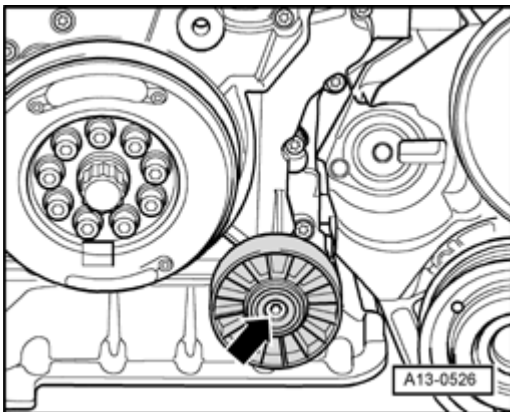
Removing Lower Idler Pulley For Ribbed Belt
